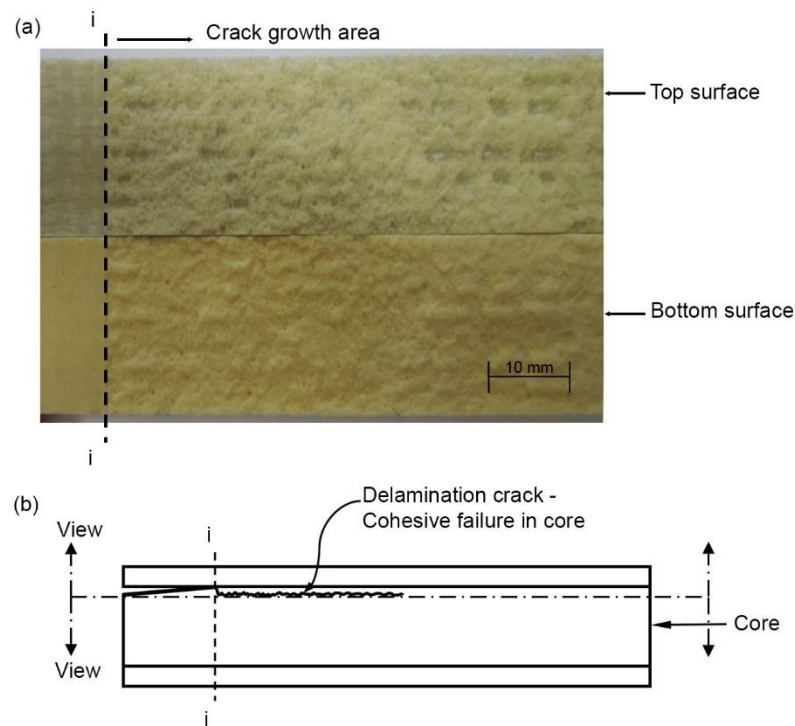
Fracture surfaces of top and bottom foam surfaces showing foam material indicative of 'cohesive failure'.
